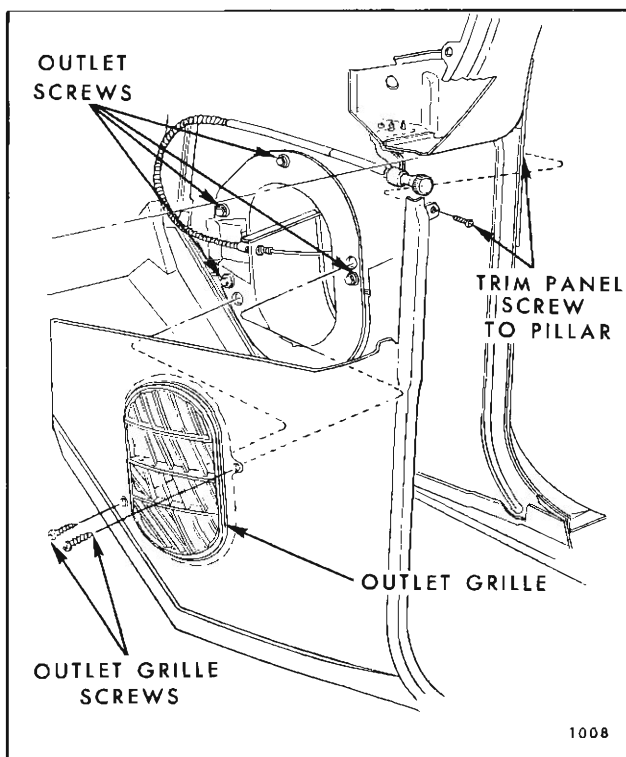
C13—Attachment of Air Outlet, Outlet Grille and Trim Panel
